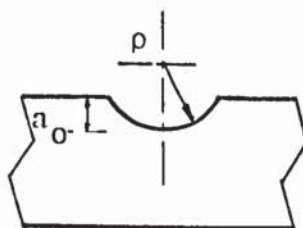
Bend Specimen Dimensions and Notch Geometry.
